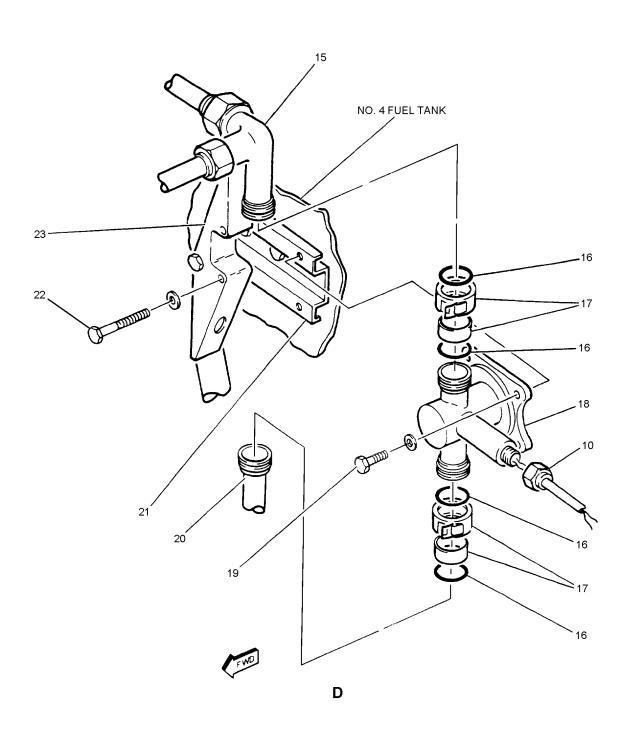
Wing Damage Fuel Shutoff Valve (5L-R110) (Sheet 2)
